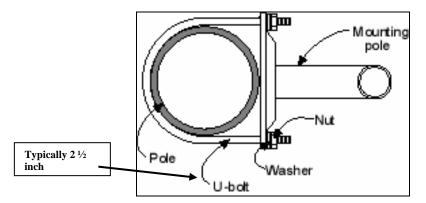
Mounting Pole Installed on Pole or Antenna Mast
